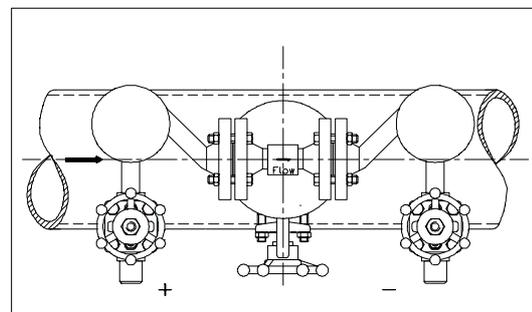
Placement of the differential pressure connecting studs for horizontal pipe arrangement
